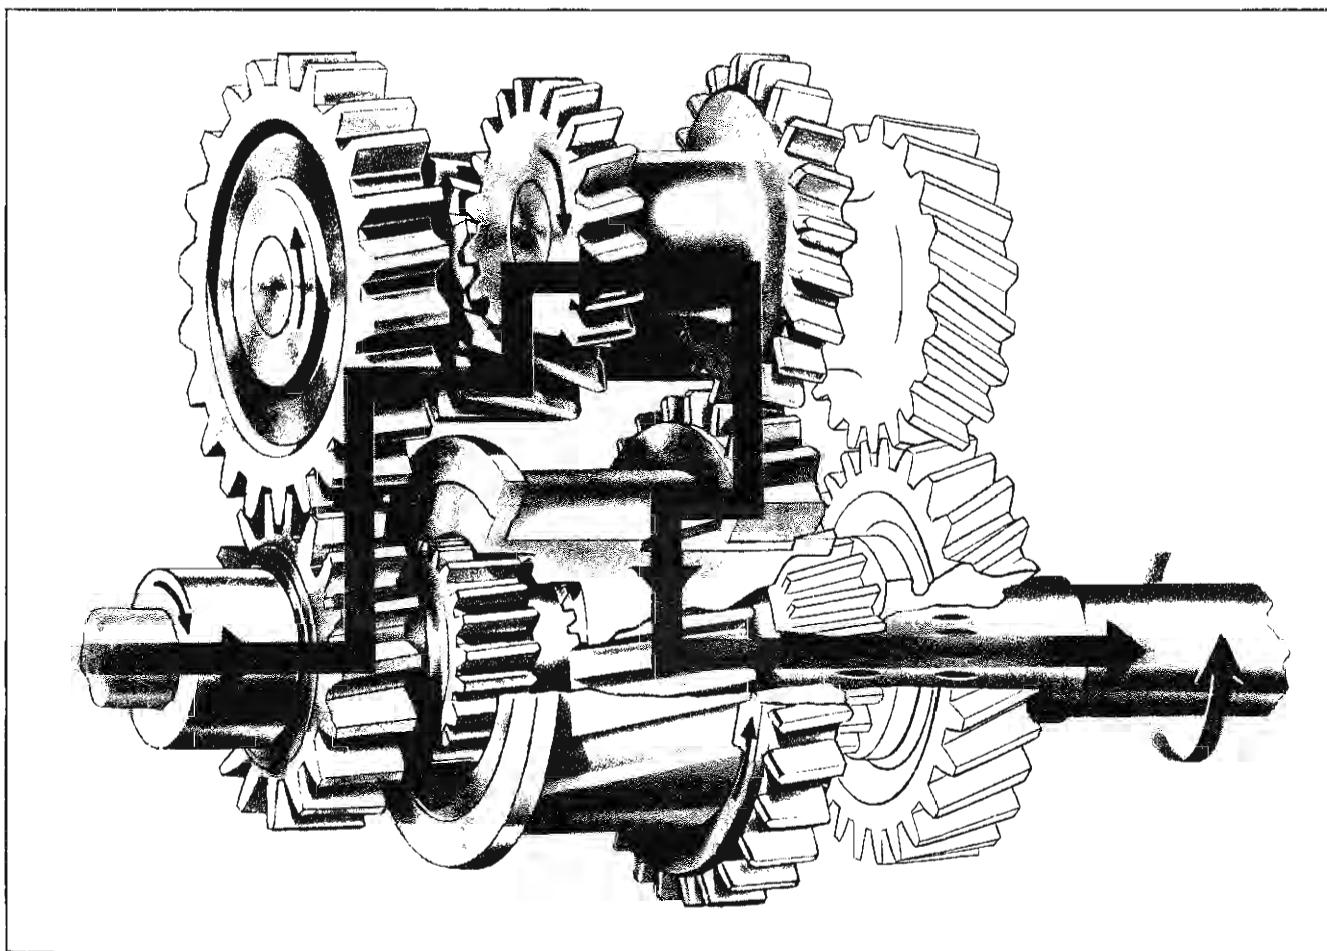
Power Flow with Transmission Gears in Reverse Position
